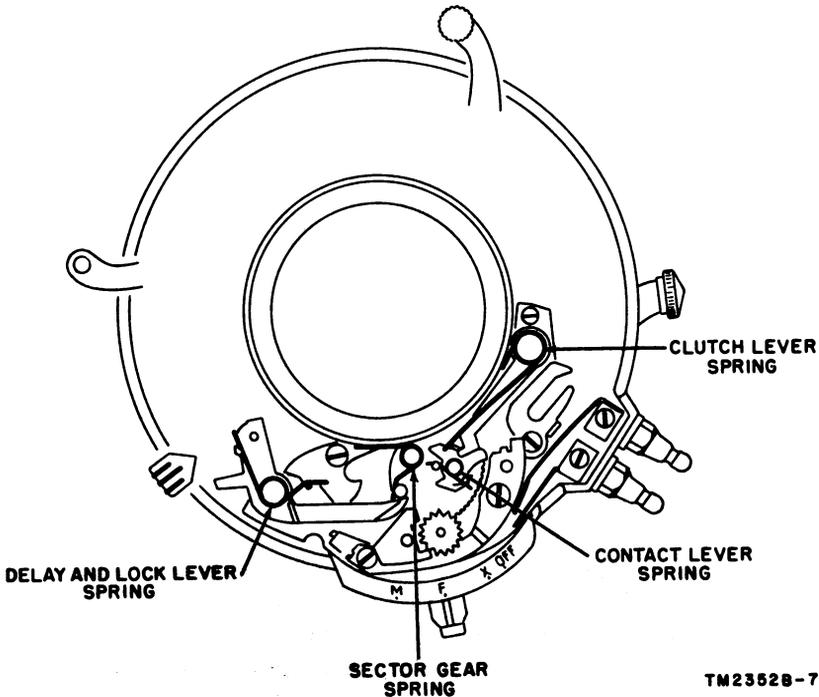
Between-the-lens shutter, synchronizer section, springs positioned
